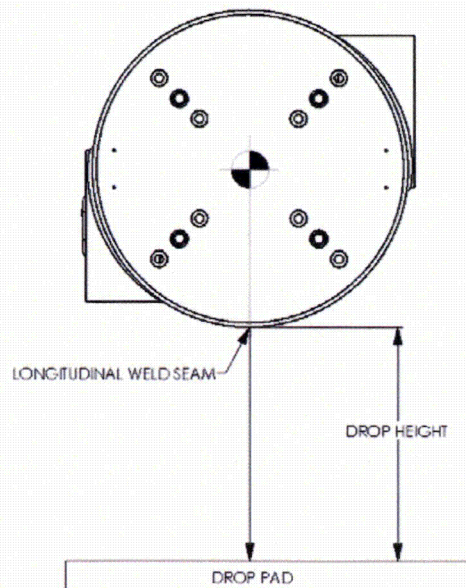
9 m (30 ft) Drop Orientation TP180C – Side Weld Seam Hit
